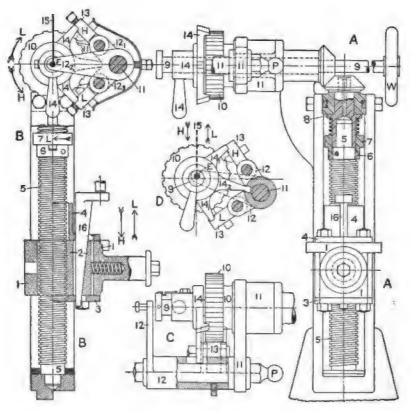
Pressure-controlled Governor for Snow Pumping-engine Gear, Fig. 477.
